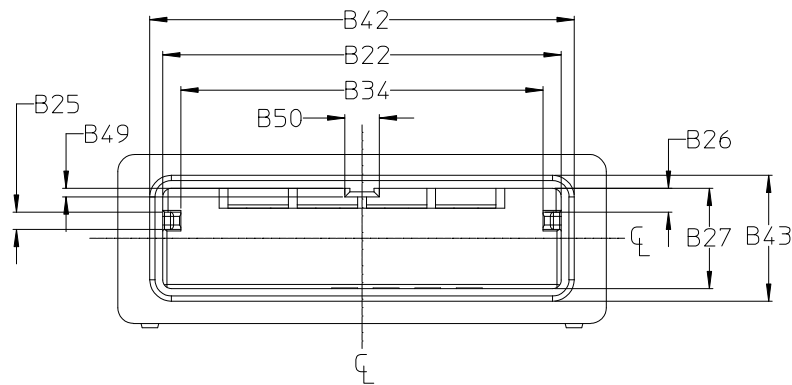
x4 EMI Guide Housing Assembly Face View
